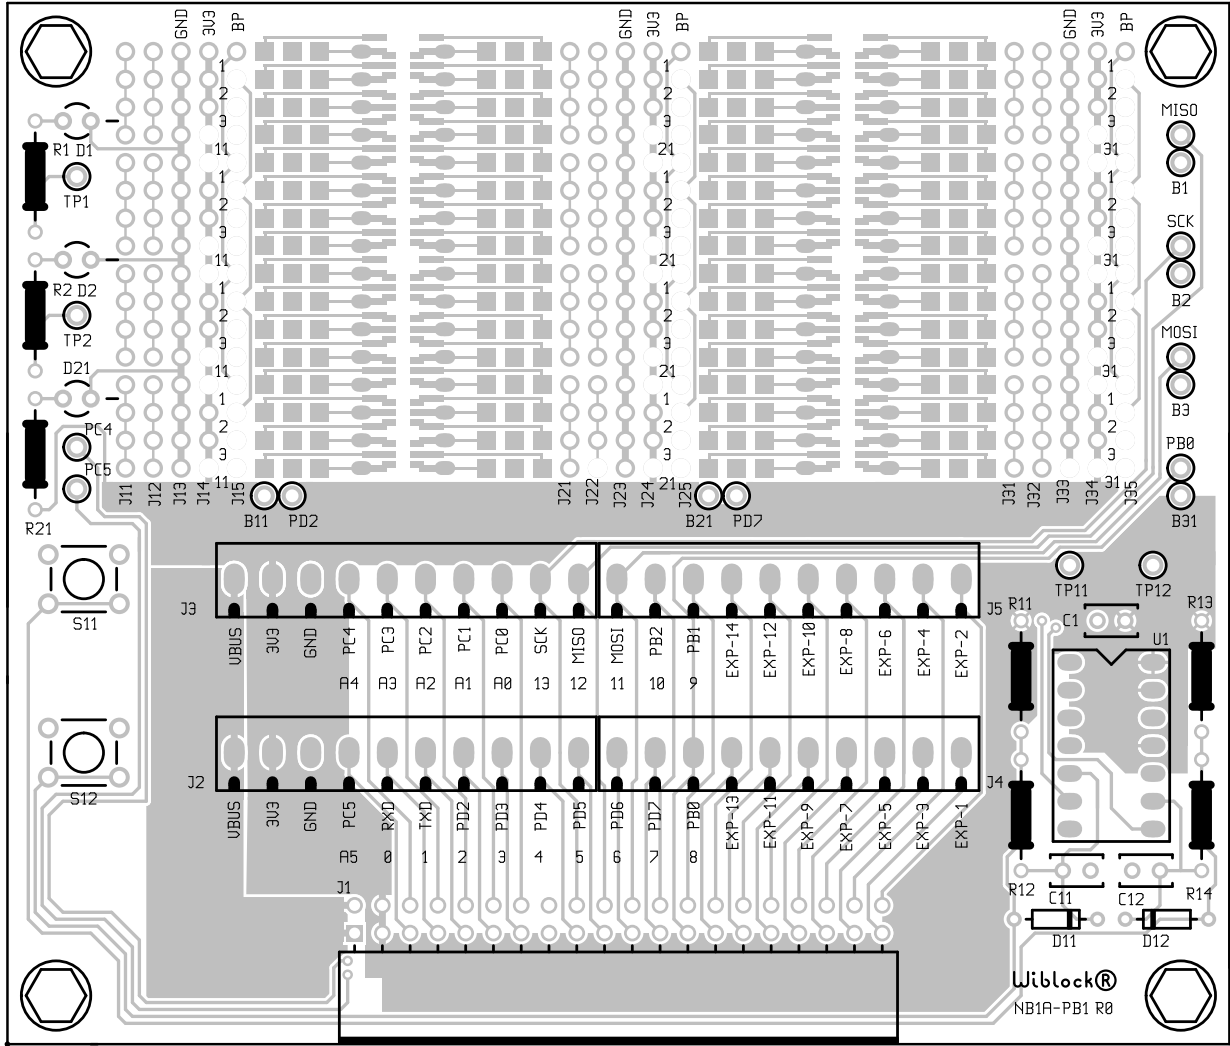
NB1A-PB1 Top Side Assembly Drawing (Rev 0)
